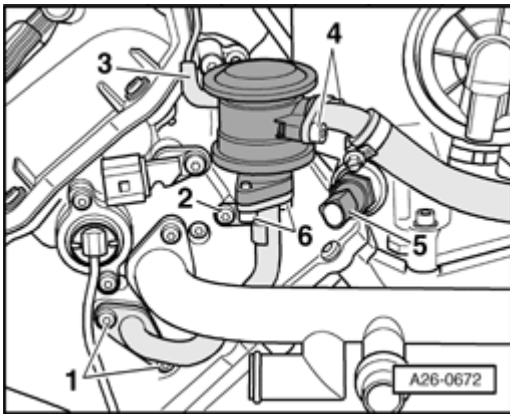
Disconnect Vacuum Hose, Electrical Harness Connector From Oil Pressure Switch F1, Removing Bolts & Oil Pressure Switch
